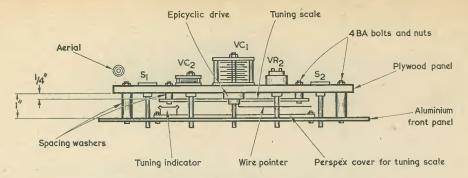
Detail illustrating the manner in which the receiver panel, tuning scale and front panel of the cabinet are assembled together
